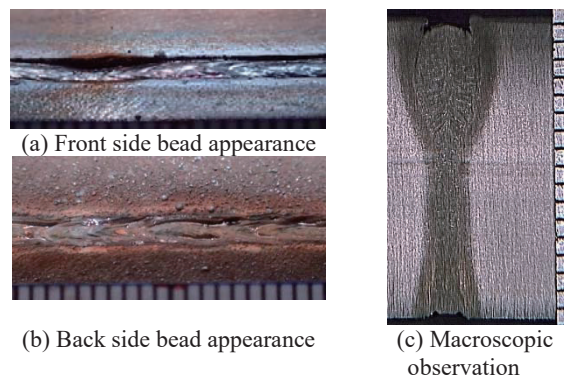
Weld bead appearance and macroscopic observation (ID: B2).
